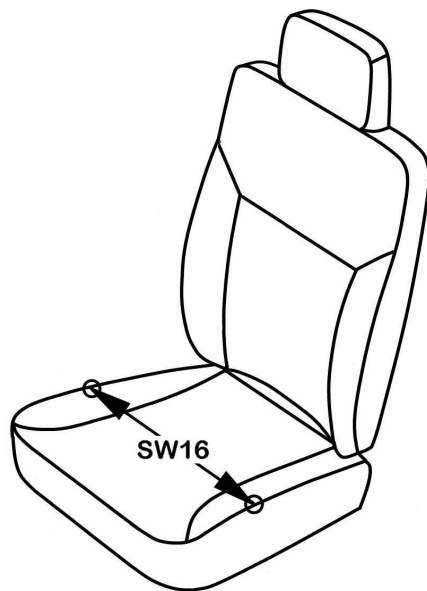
B—BUCKET SEAT WIDTH DIMENSION
